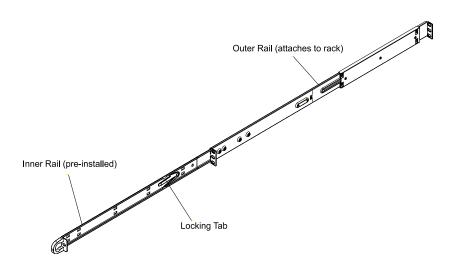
Identifying the Sections of the Rack Rails (right side rail shown)
